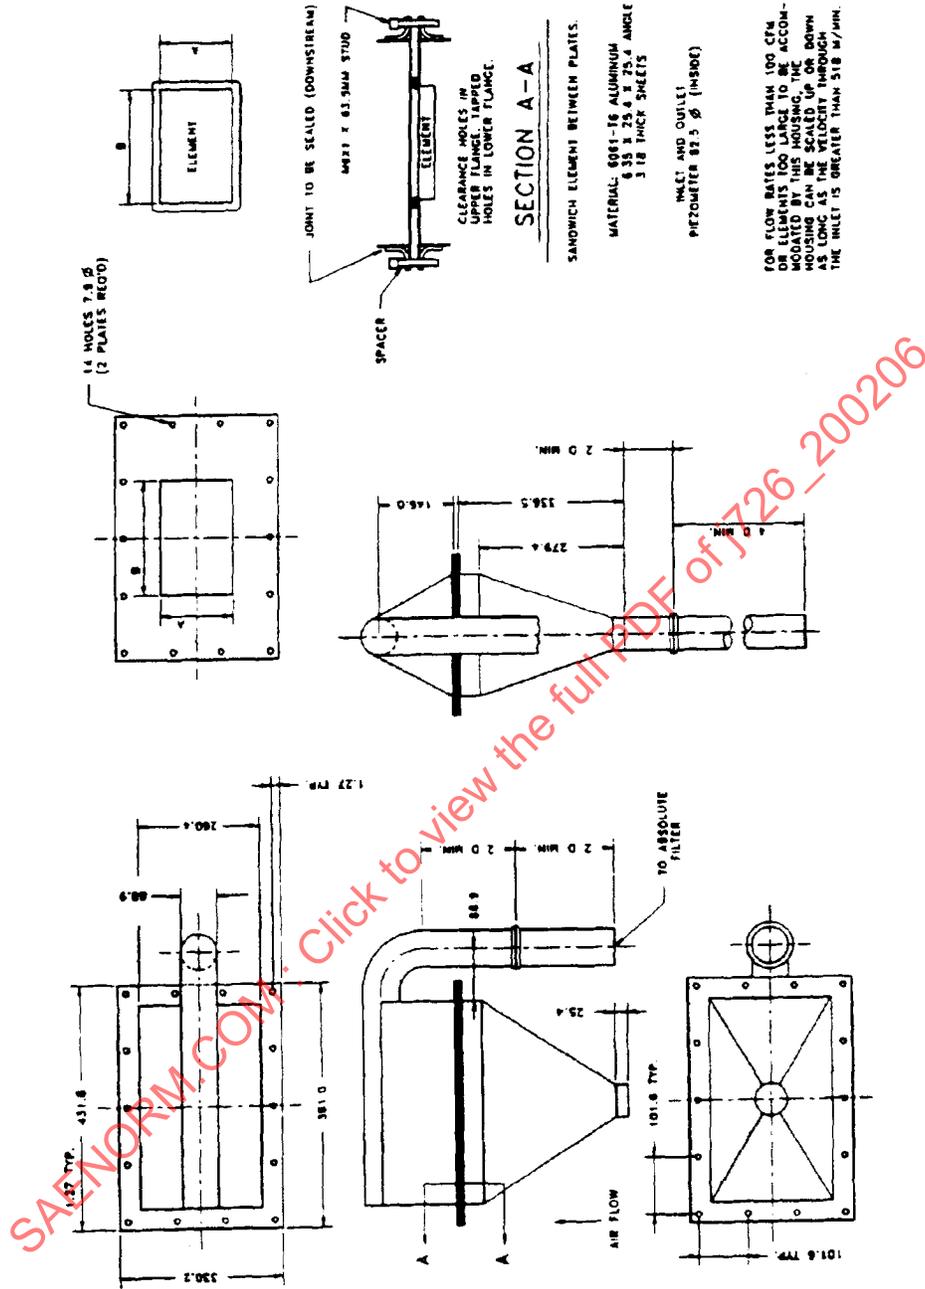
PANEL FILTER UNIVERSAL TEST HOUSING
